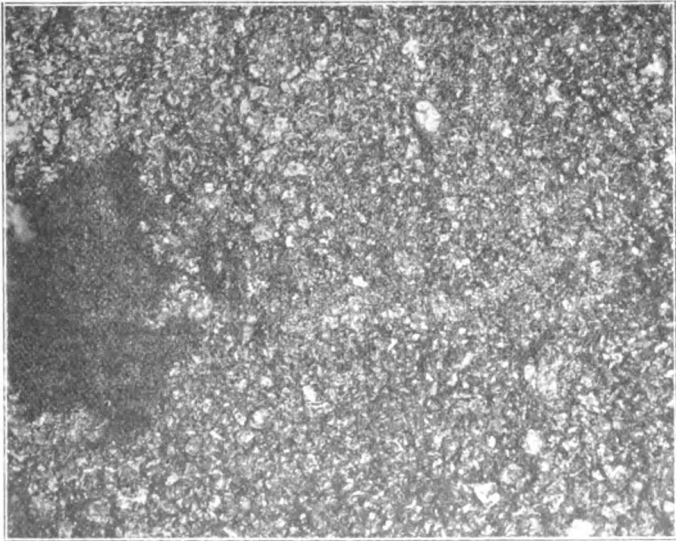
RADIATOR CORE MADE FROM BURNED SAND
